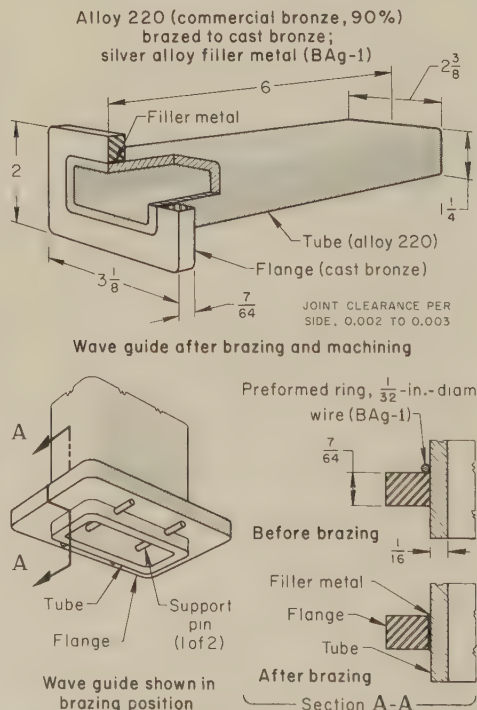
Wave-guide assembly that was brazed by partial immersion in a molten salt bath (Example 661)
